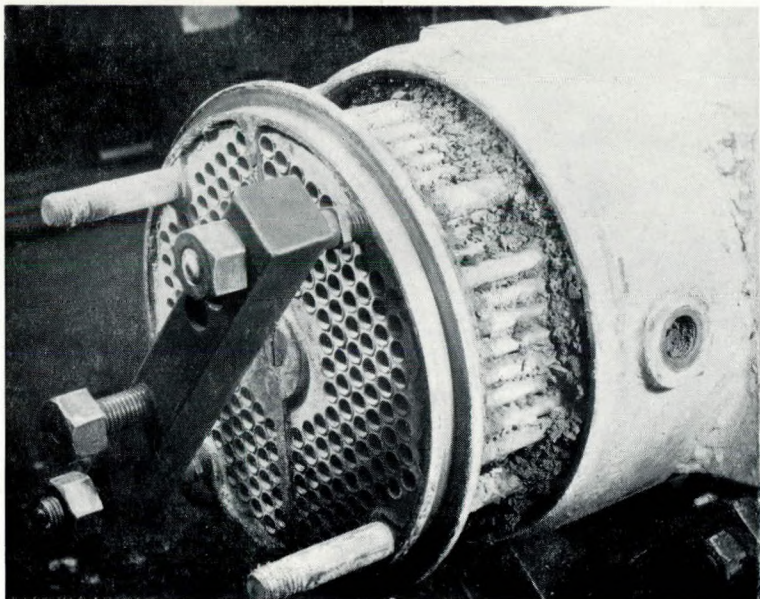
(top left)—Heat exchanger badly fouled on the engine coolant side after comparatively short service, but with sea water side in pristine condition
